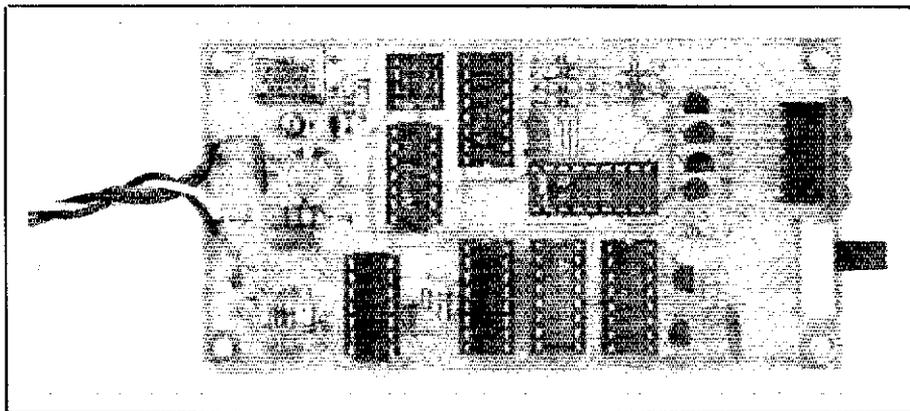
The A & A Engineering version of the frequency counter. A double-sided PC board is used. A right-angle socket is used to mount DS1. The display can be remotely located by using a DIP jumper cable between the socket for DS1 and the display. A DPDT slide switch is shown in this version. You can substitute a remotely located DPDT toggle switch.
